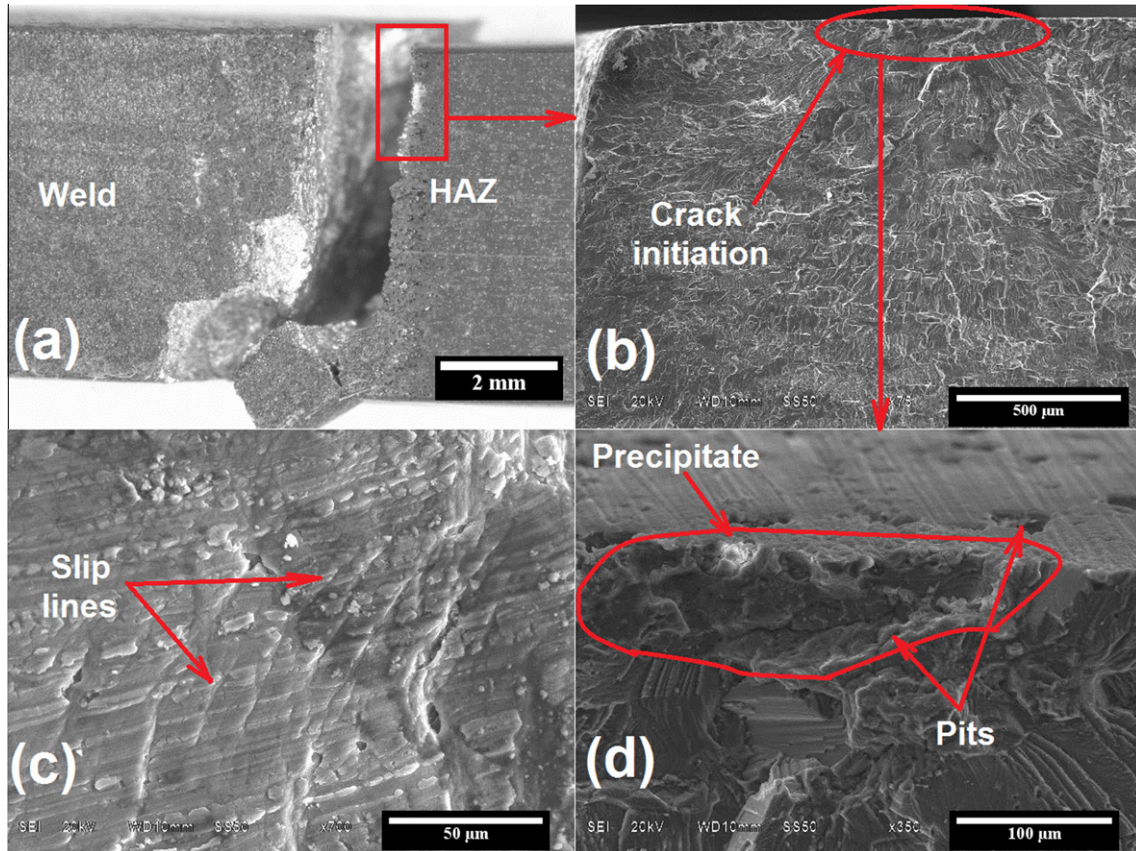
Fatigue failure of aluminium 6061-T651 welded with ER5183 filler wire tested in a 3.5% NaCl solution: (a) crack location at the interface between the weld metal and heat-affected zone; (b) fatigue crack initiation site; (c) the fracture surface with precipitates; and (d) fatigue crack initiation associated with corrosion pits and precipitates.
